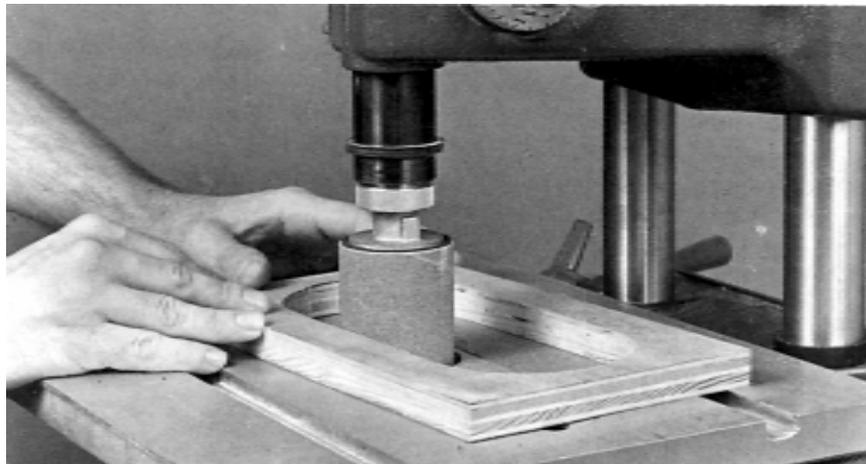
To sand internal edges, position the stock before extending the quill.
